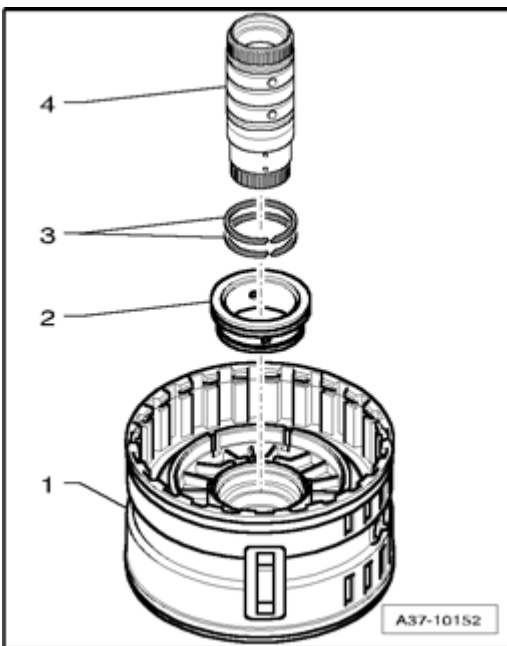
Rectangular Rings, Bushing And Cylinder "D/E"
